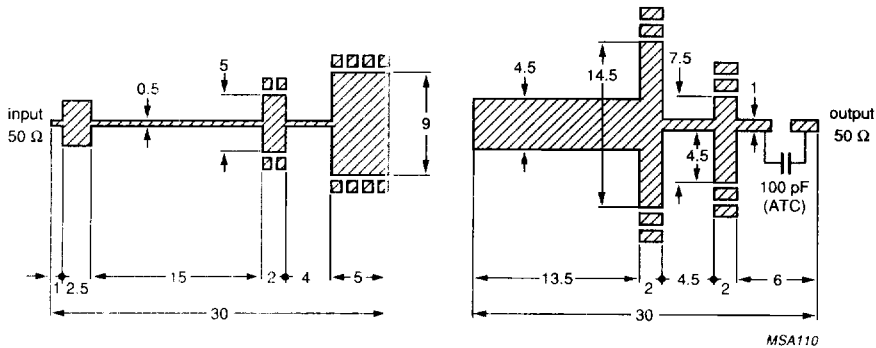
Wideband test circuit boards for 1.4 to 1.8 GHz (dimensions in mm); Epsilam p.c. board; thickness 0.635 mm; ε_r = 10.
